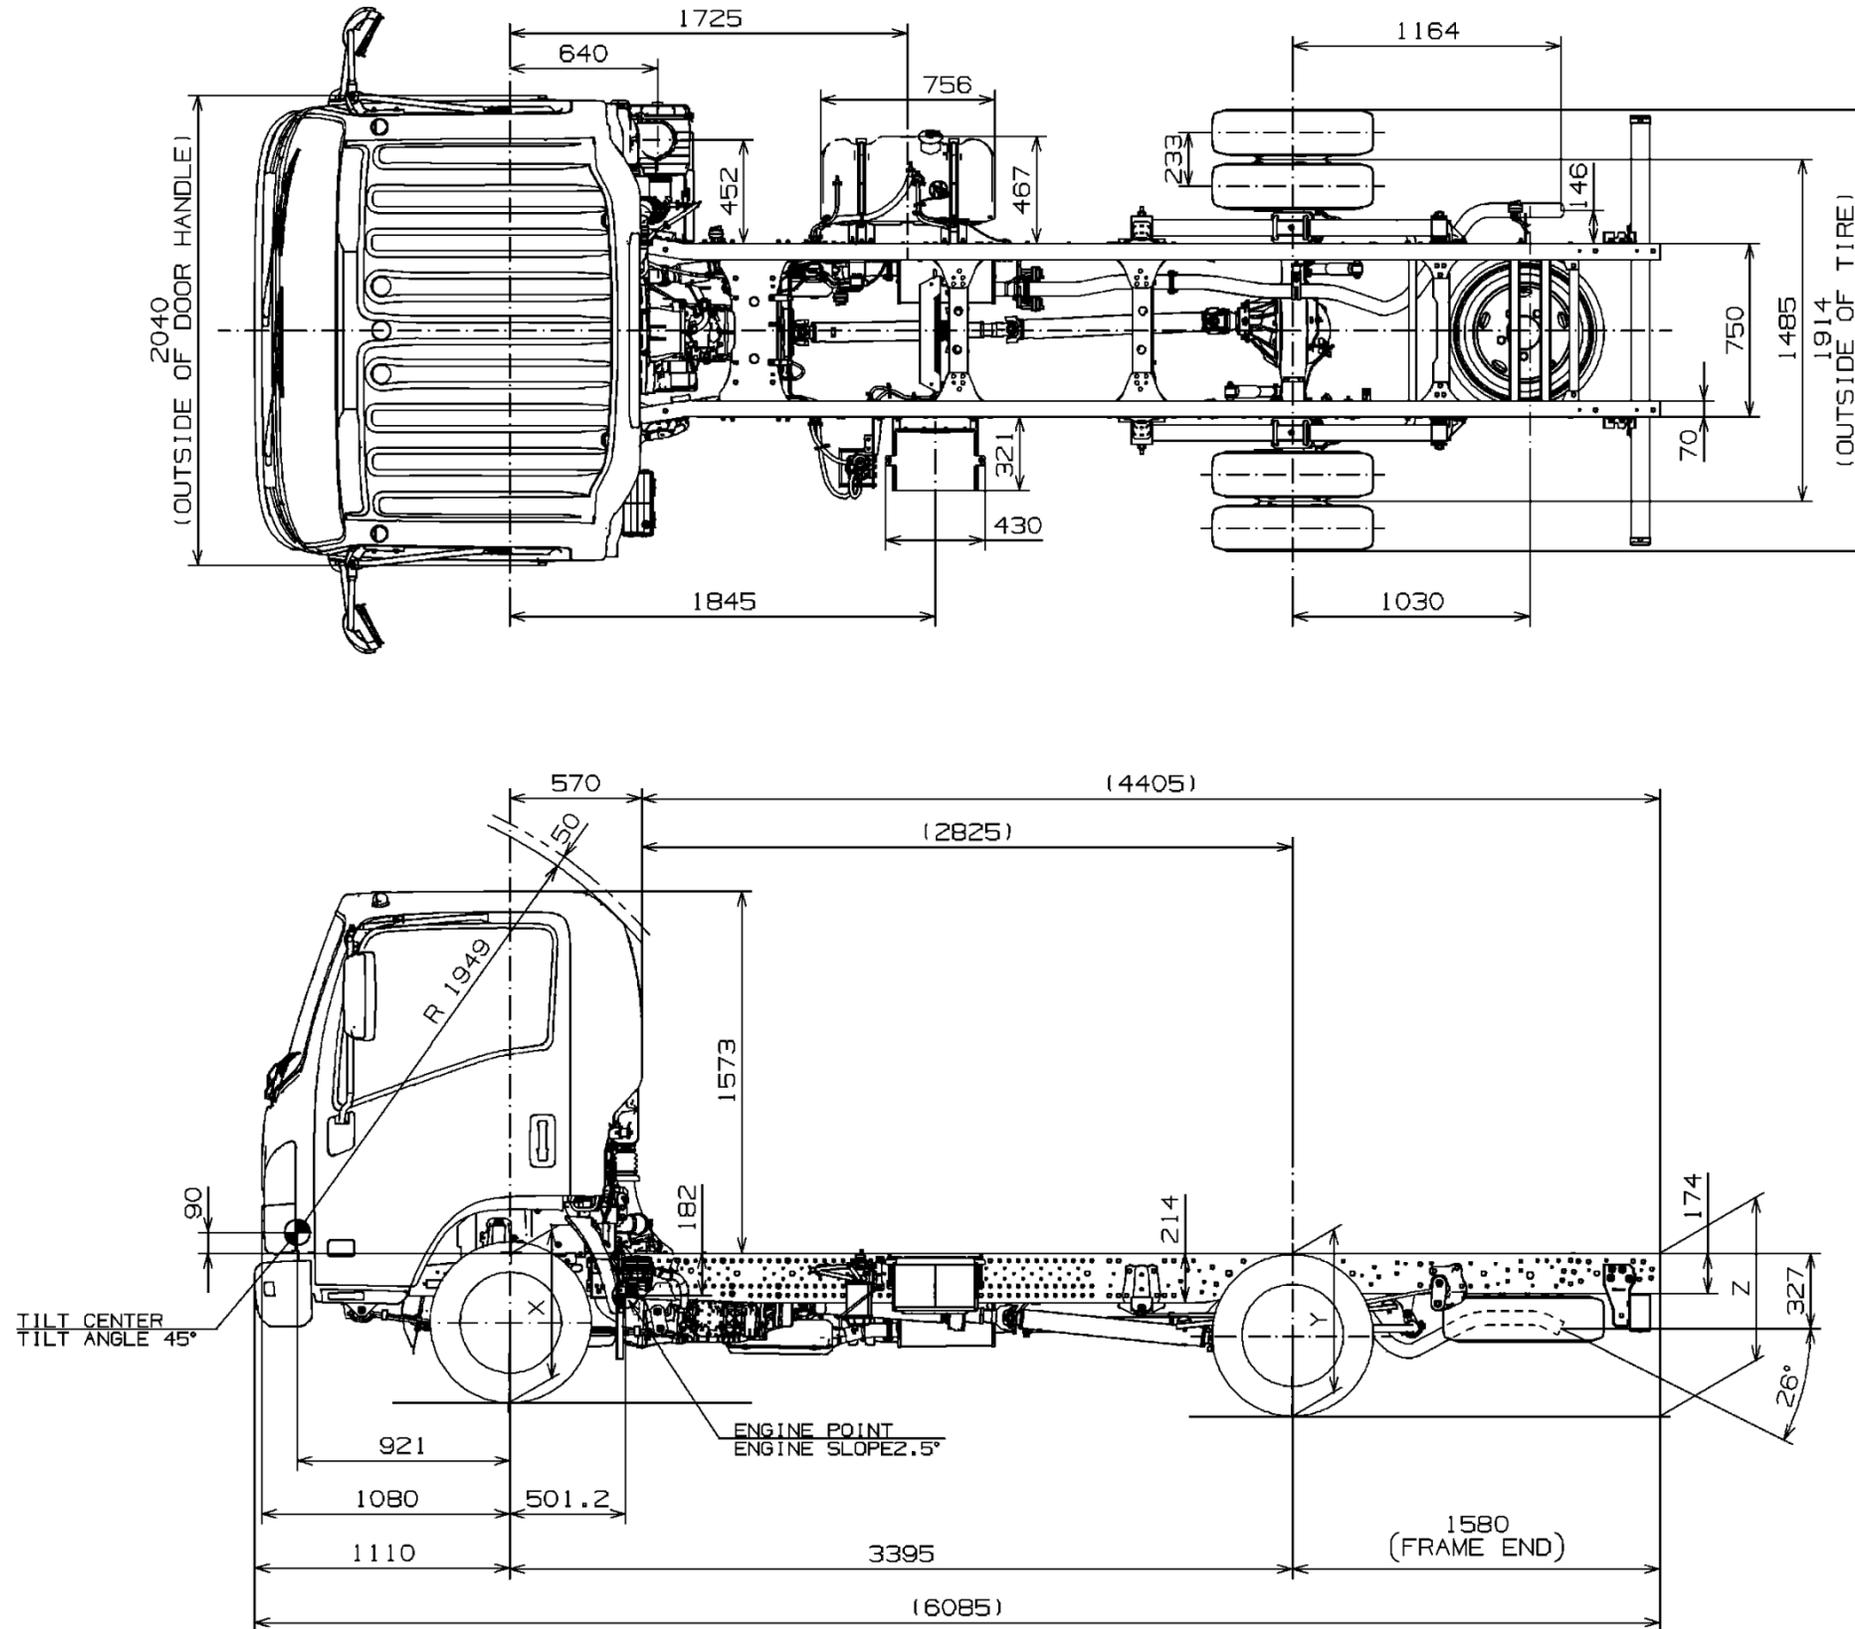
Cab Chassis Drawing NNR85L-HD5WYEN
